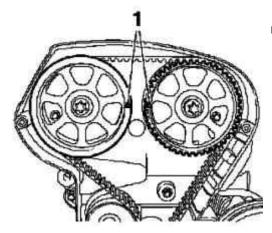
The combination of marks on camshaft gears: 1 - Tags
